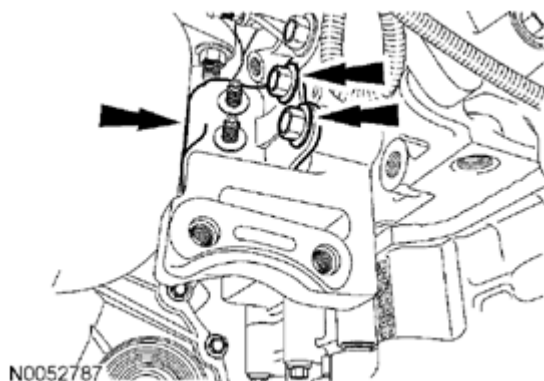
Locating Bolts And RH Exhaust Heat Shield Bracket (Inboard Half)
